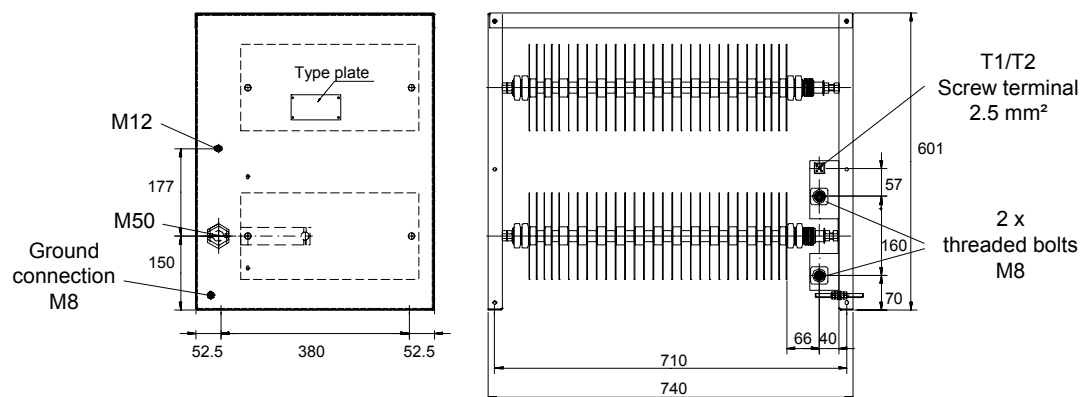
Dimension drawing of the braking resistor (25 kW / 125 kW)
